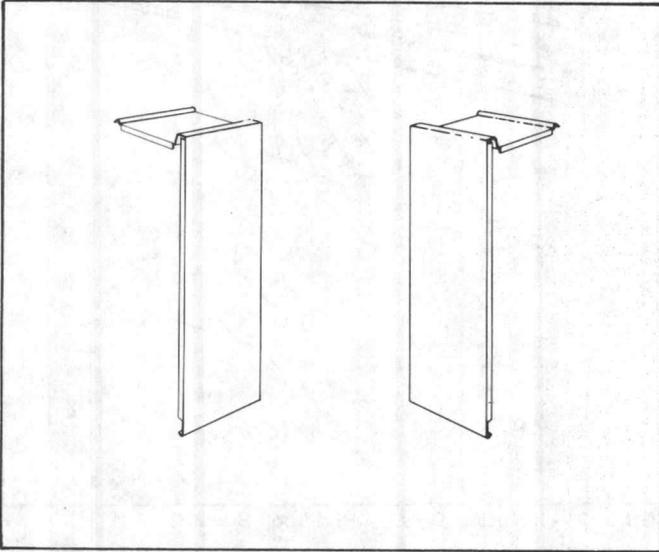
Enclosure Extensions (Left-hand and Right-hand)
